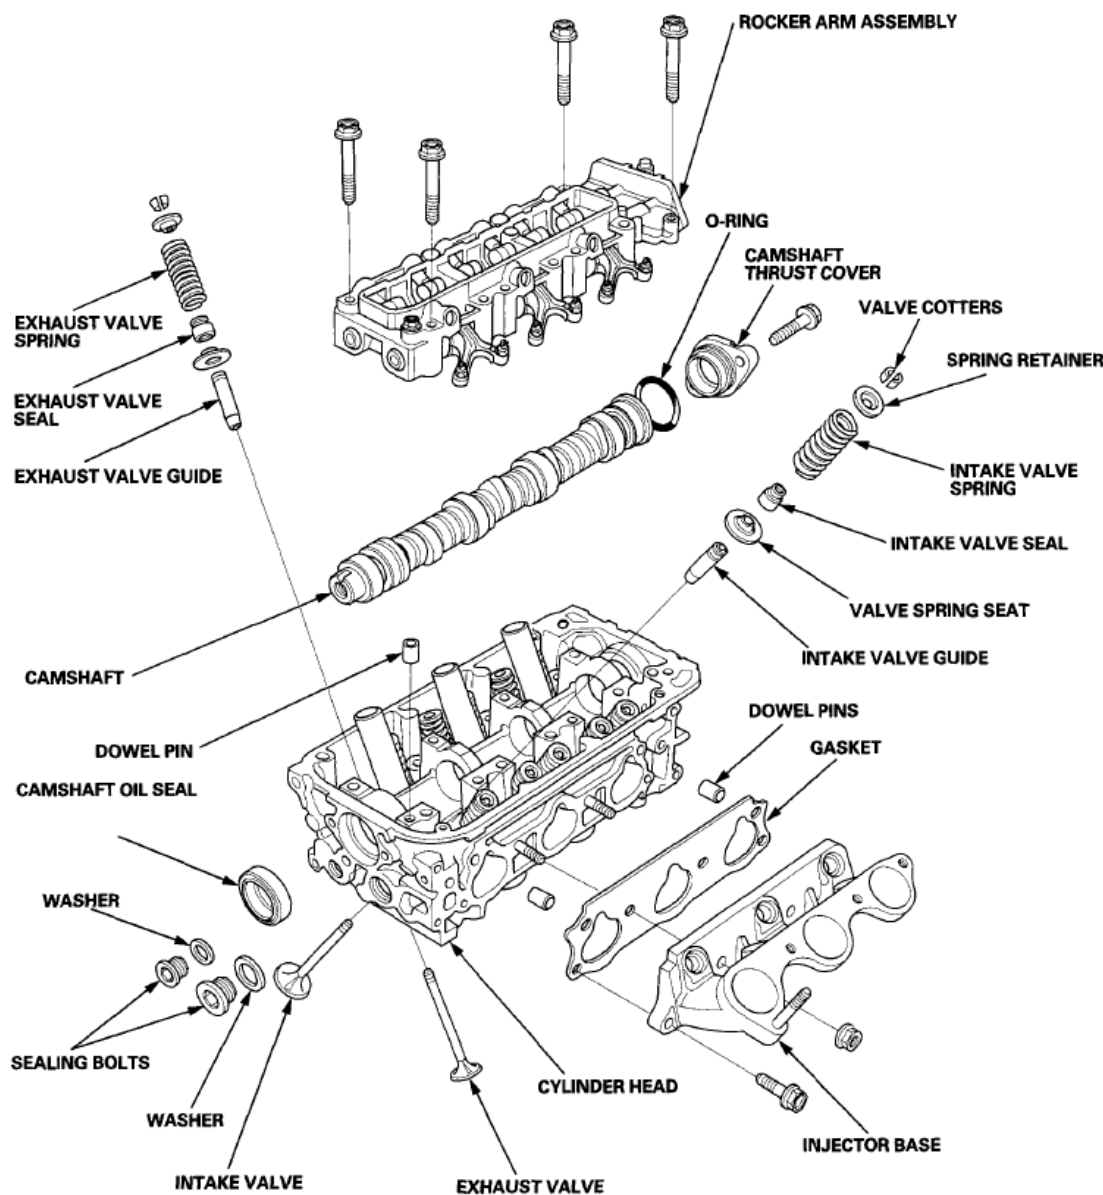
Exploded View Of Cylinder Head - Rear Components Location
